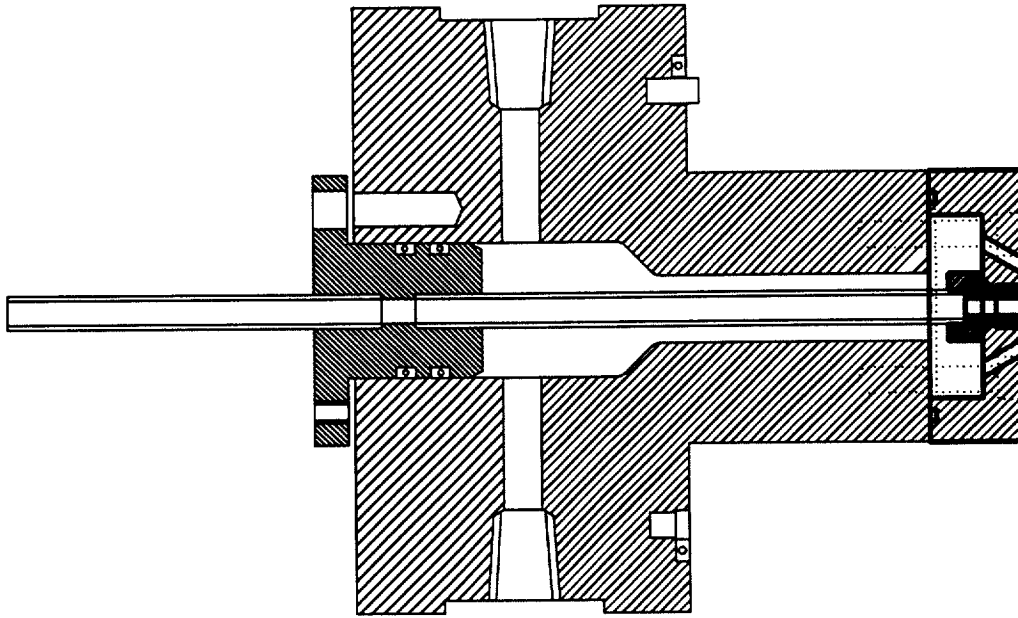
Assembly drawing for the O-F-O triplet injector. The injector assembly consists of a GO₂ manifold body, a GH₂ post that feeds through the GO₂ manifold body and screws to the injector faceplate.
